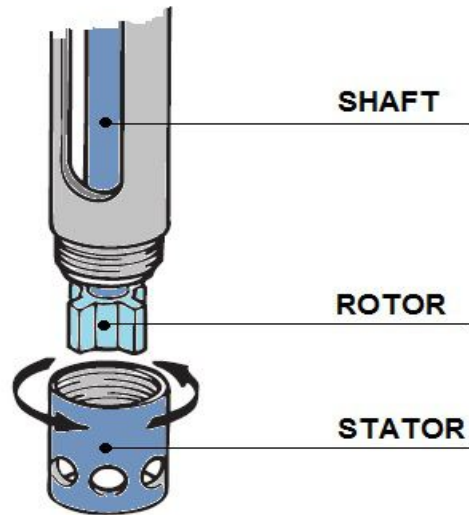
The HSM design. The shaft is connected to the rotor and the stator will be placed around the rotor after mounting.
